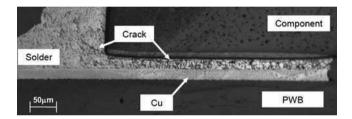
Microsection of SnPb solder joint of a ceramic leadless component after accelerated stress test. Crack paths are already starting to propagate. The electrical and mechanical properties of the solder joint have degraded. Such solder joints might be seen as degraded product performance
